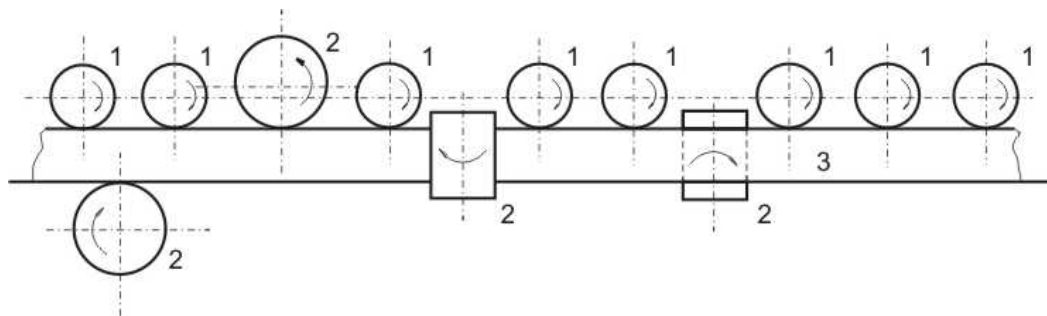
Schematic representation of the four side planing machine working space: 1 - feed rolls, 2 - planing heads, 3 - workpiece
